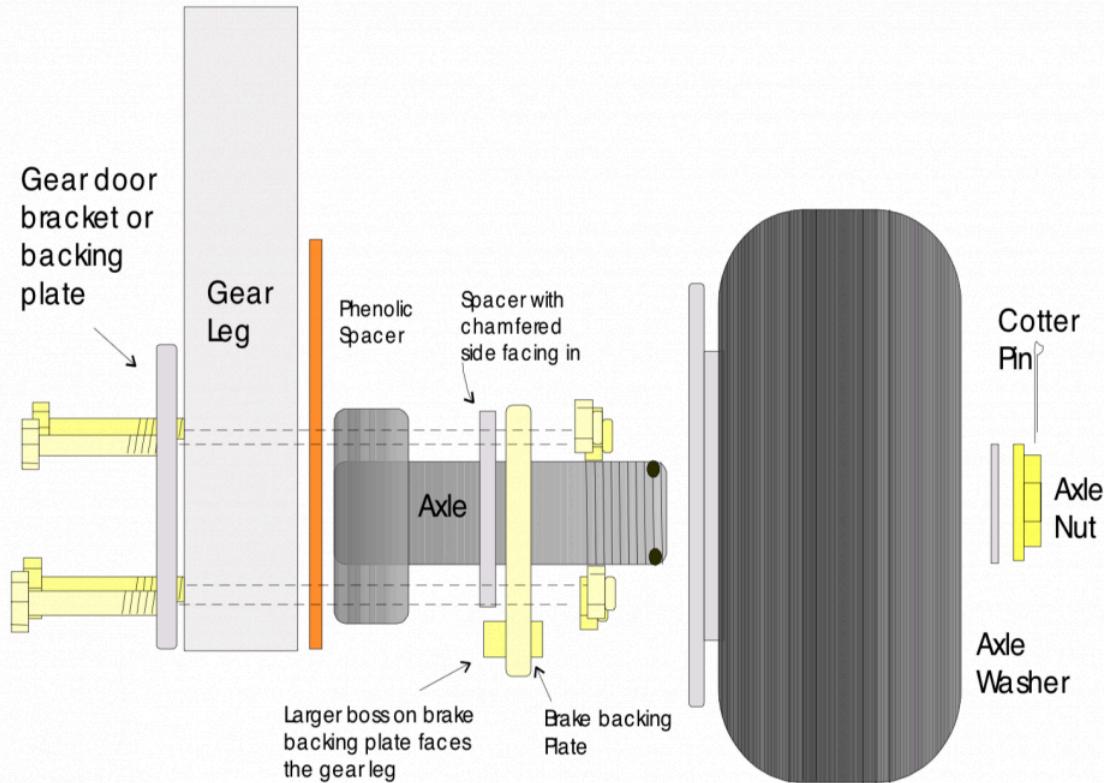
Cleveland Brake Axle Spacer and Backing Plate
